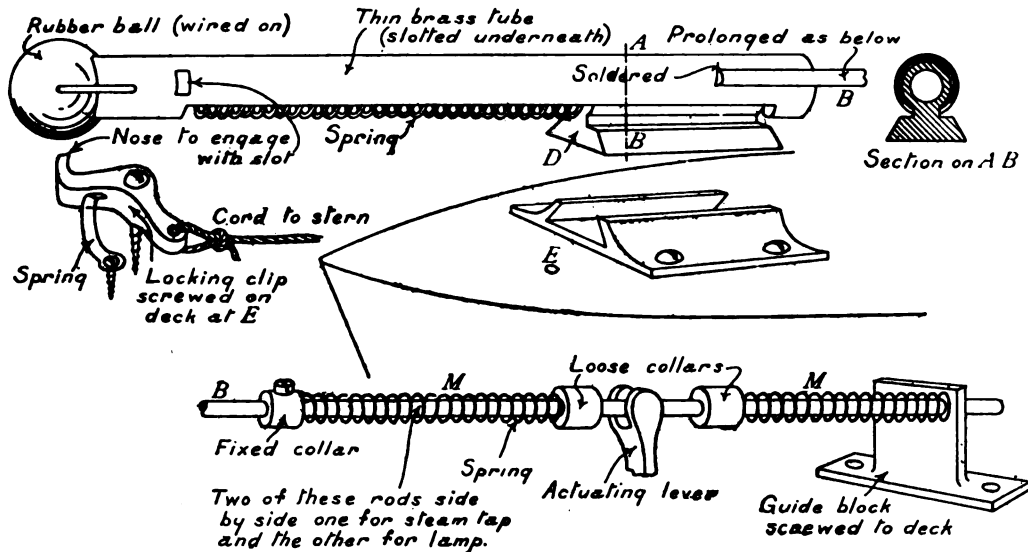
SHOWING ARRANGEMENT OF DECK STRIKER. (Scale: About half size.)
